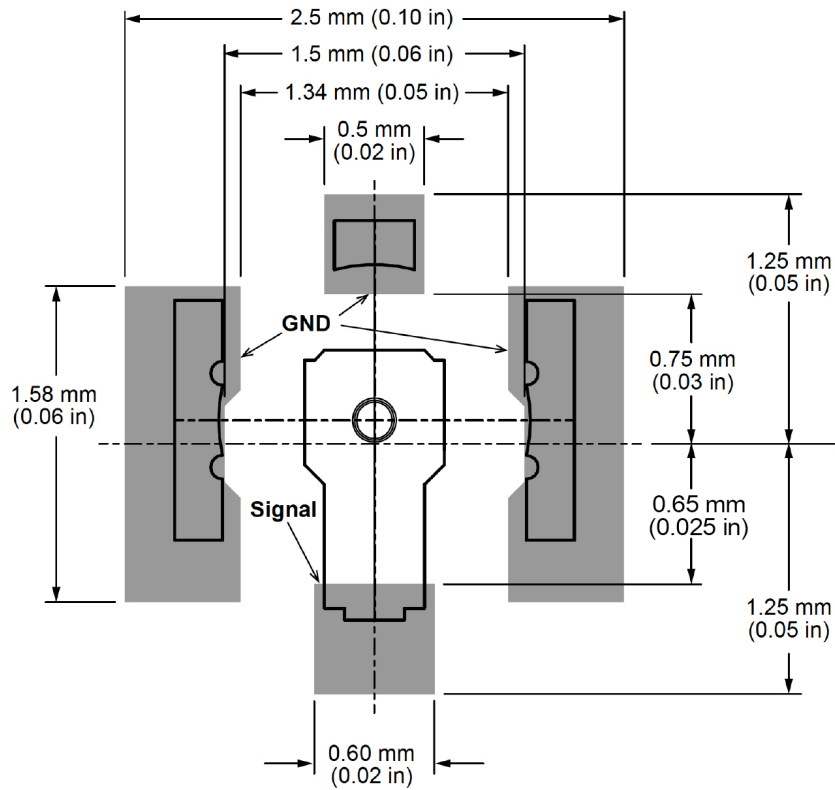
Recommended PCB Dimensions for the CONMHF4-SMD
